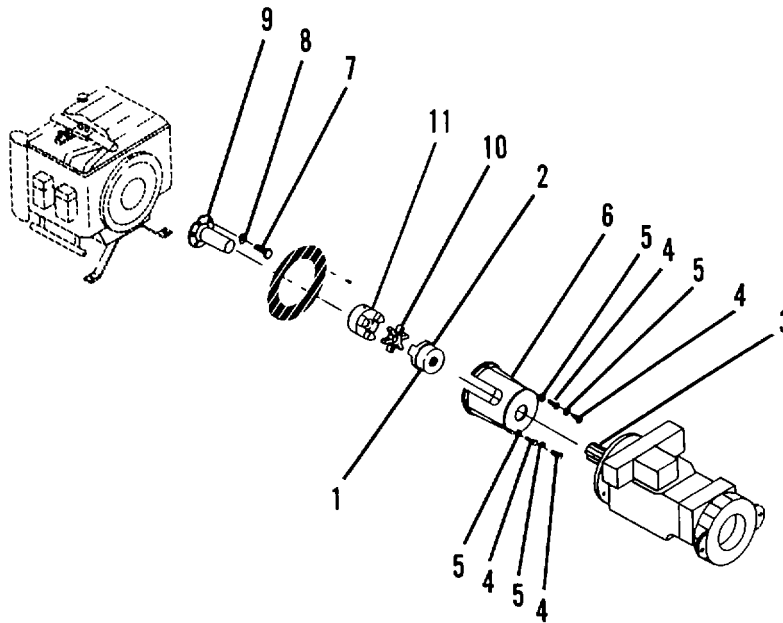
Stub Shaft and Coupling (Sheet 2 of 2).
